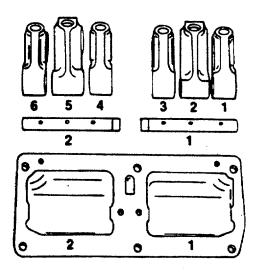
Marking Cam Follower Levers and Shafts.
